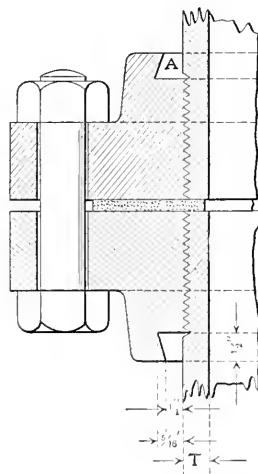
SCREWED FLANGES WITH CALKING RECESS
